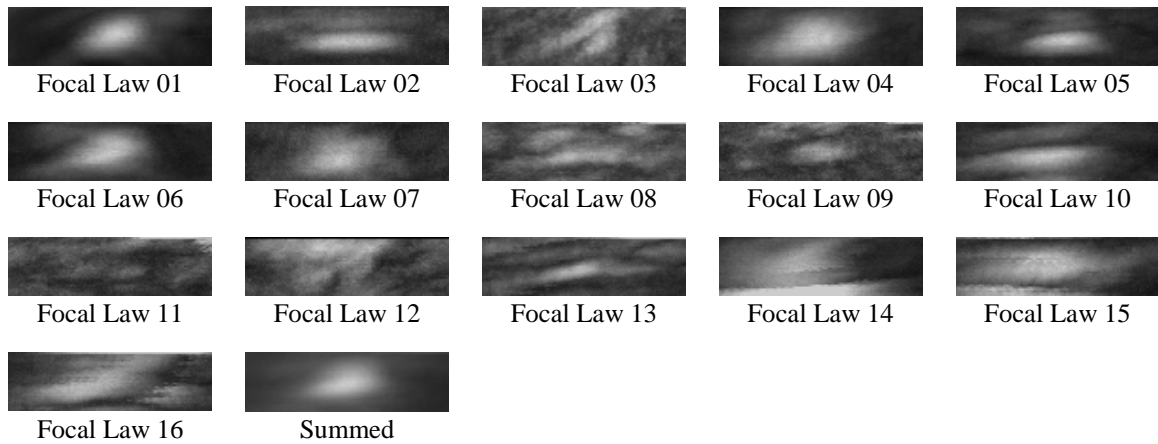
3D method inspection C-scans of curved interface forging coupon #12.
